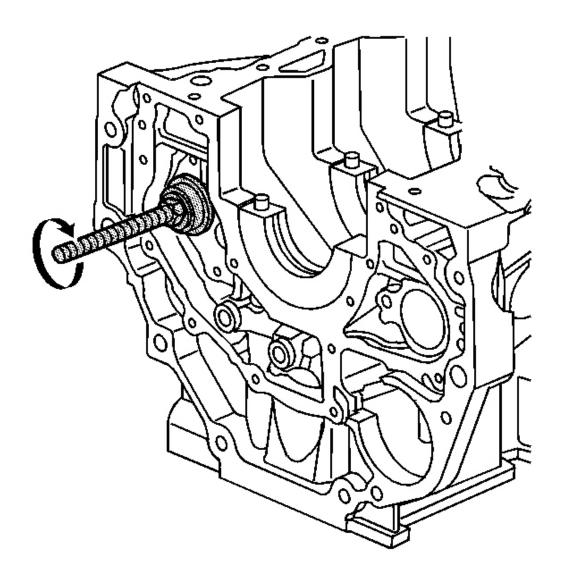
Installing 44225 Into Right Balance Shaft Bearing Bore Courtesy of GENERAL MOTORS CORP.
